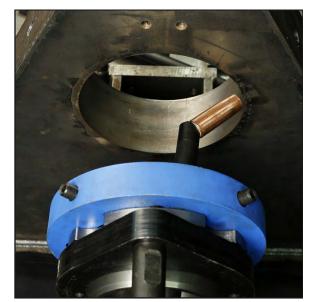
SWINGING THE BORE WELDER TO ATTAIN CENTER
